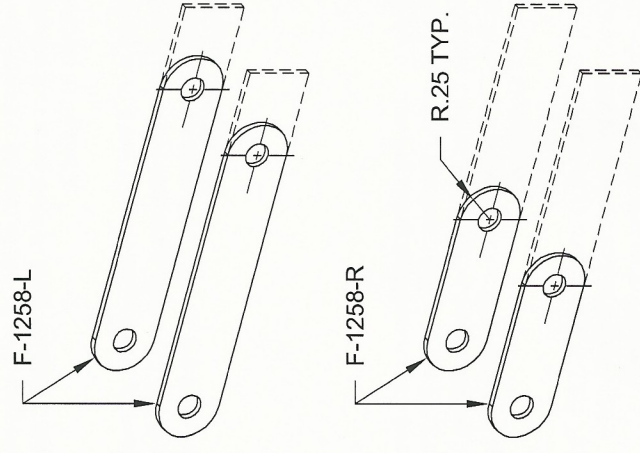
TRIMMING THE RUDDER CABLE LINKS
